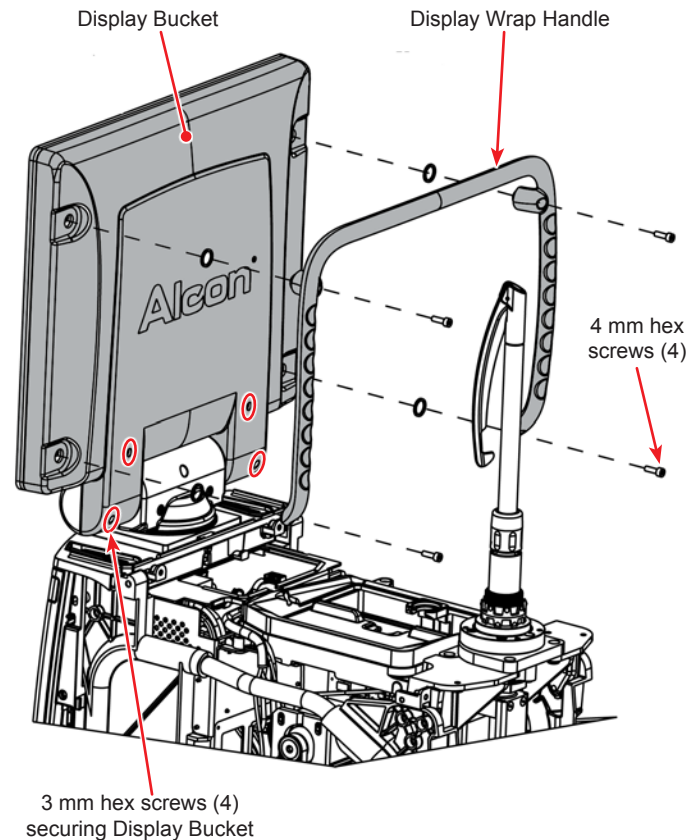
Display Wrap Handle and Display Bucket Removal
